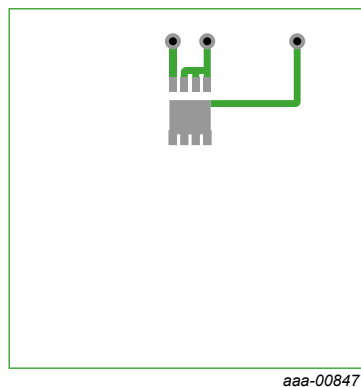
PCB layout for thermal resistance junction to ambient minimum footprint; FR4 Board; 2oz copper
